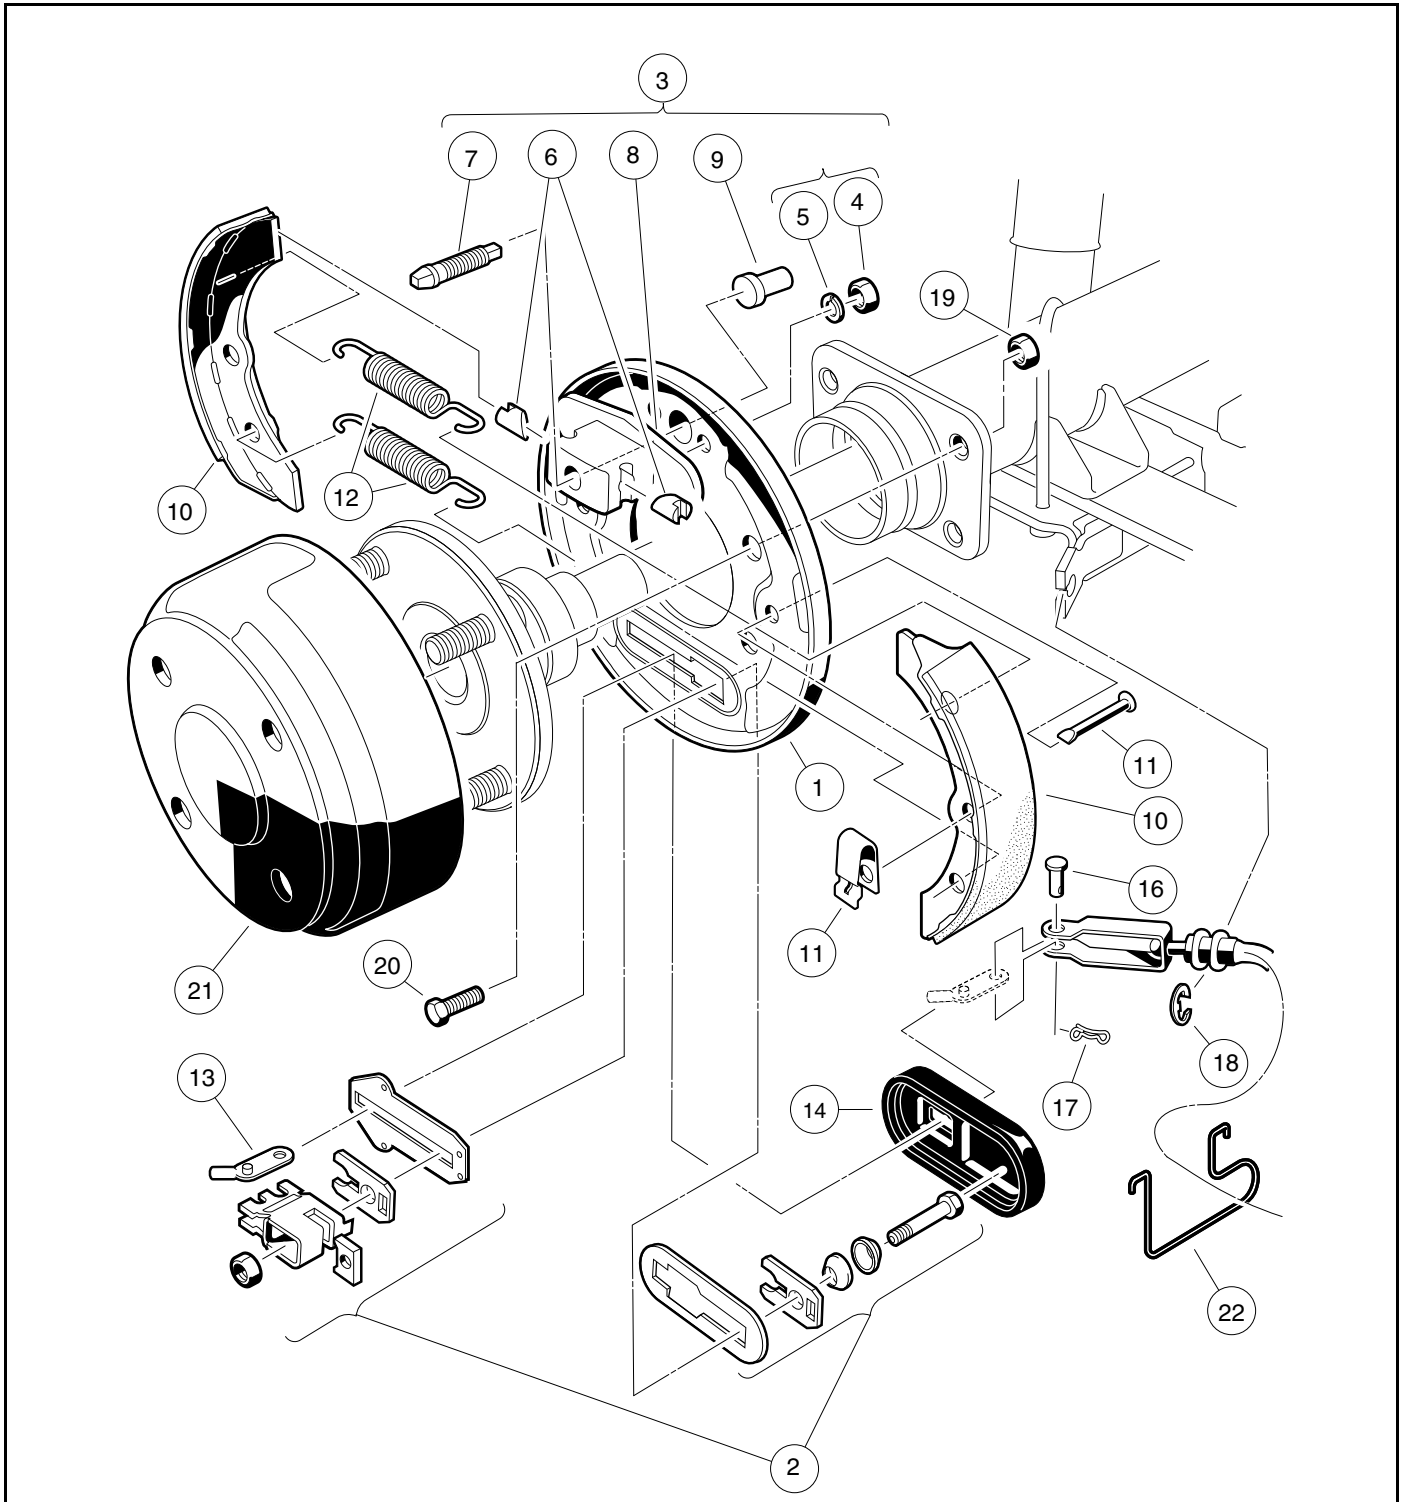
Rear Manually-Adjusted Brake Assembly
